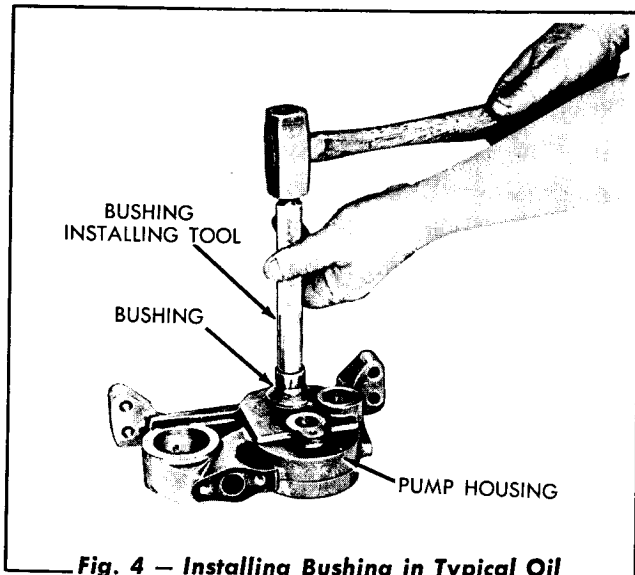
Installing Bushing in Typical Oil Pressure Pump Housing
